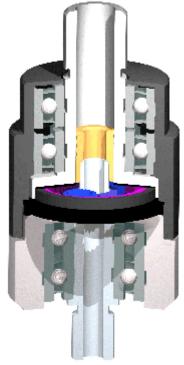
The new micro-gearbox MHD 10-160-SP with hollow shaft
